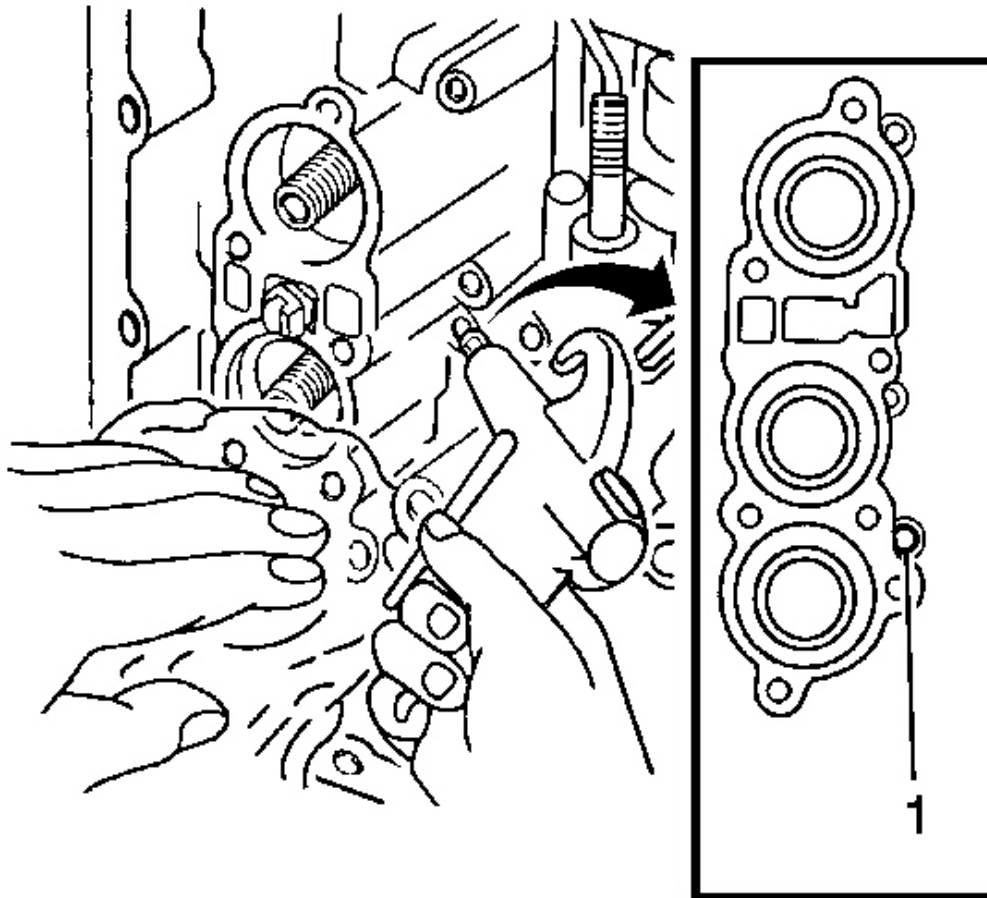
Applying Compressed Air To Oil Hole & Removing Direct Clutch Accumulator Piston & Spring.
